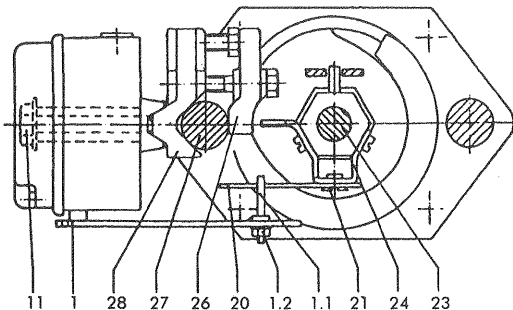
· Attachment in the case of rod type valve (e.g. type 201)
